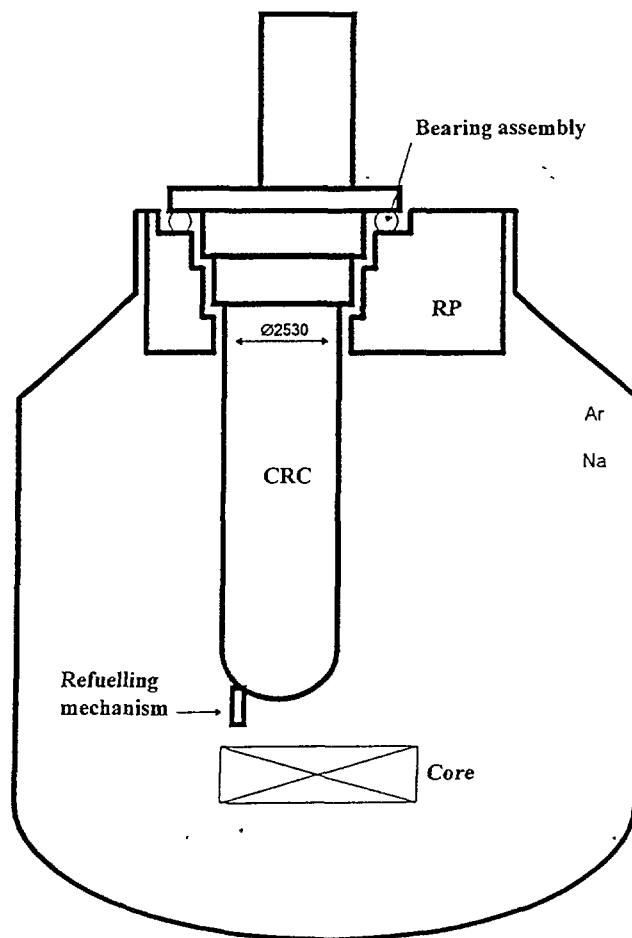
Scheme of the BN-600 reactor vessel with rotating plugs.
